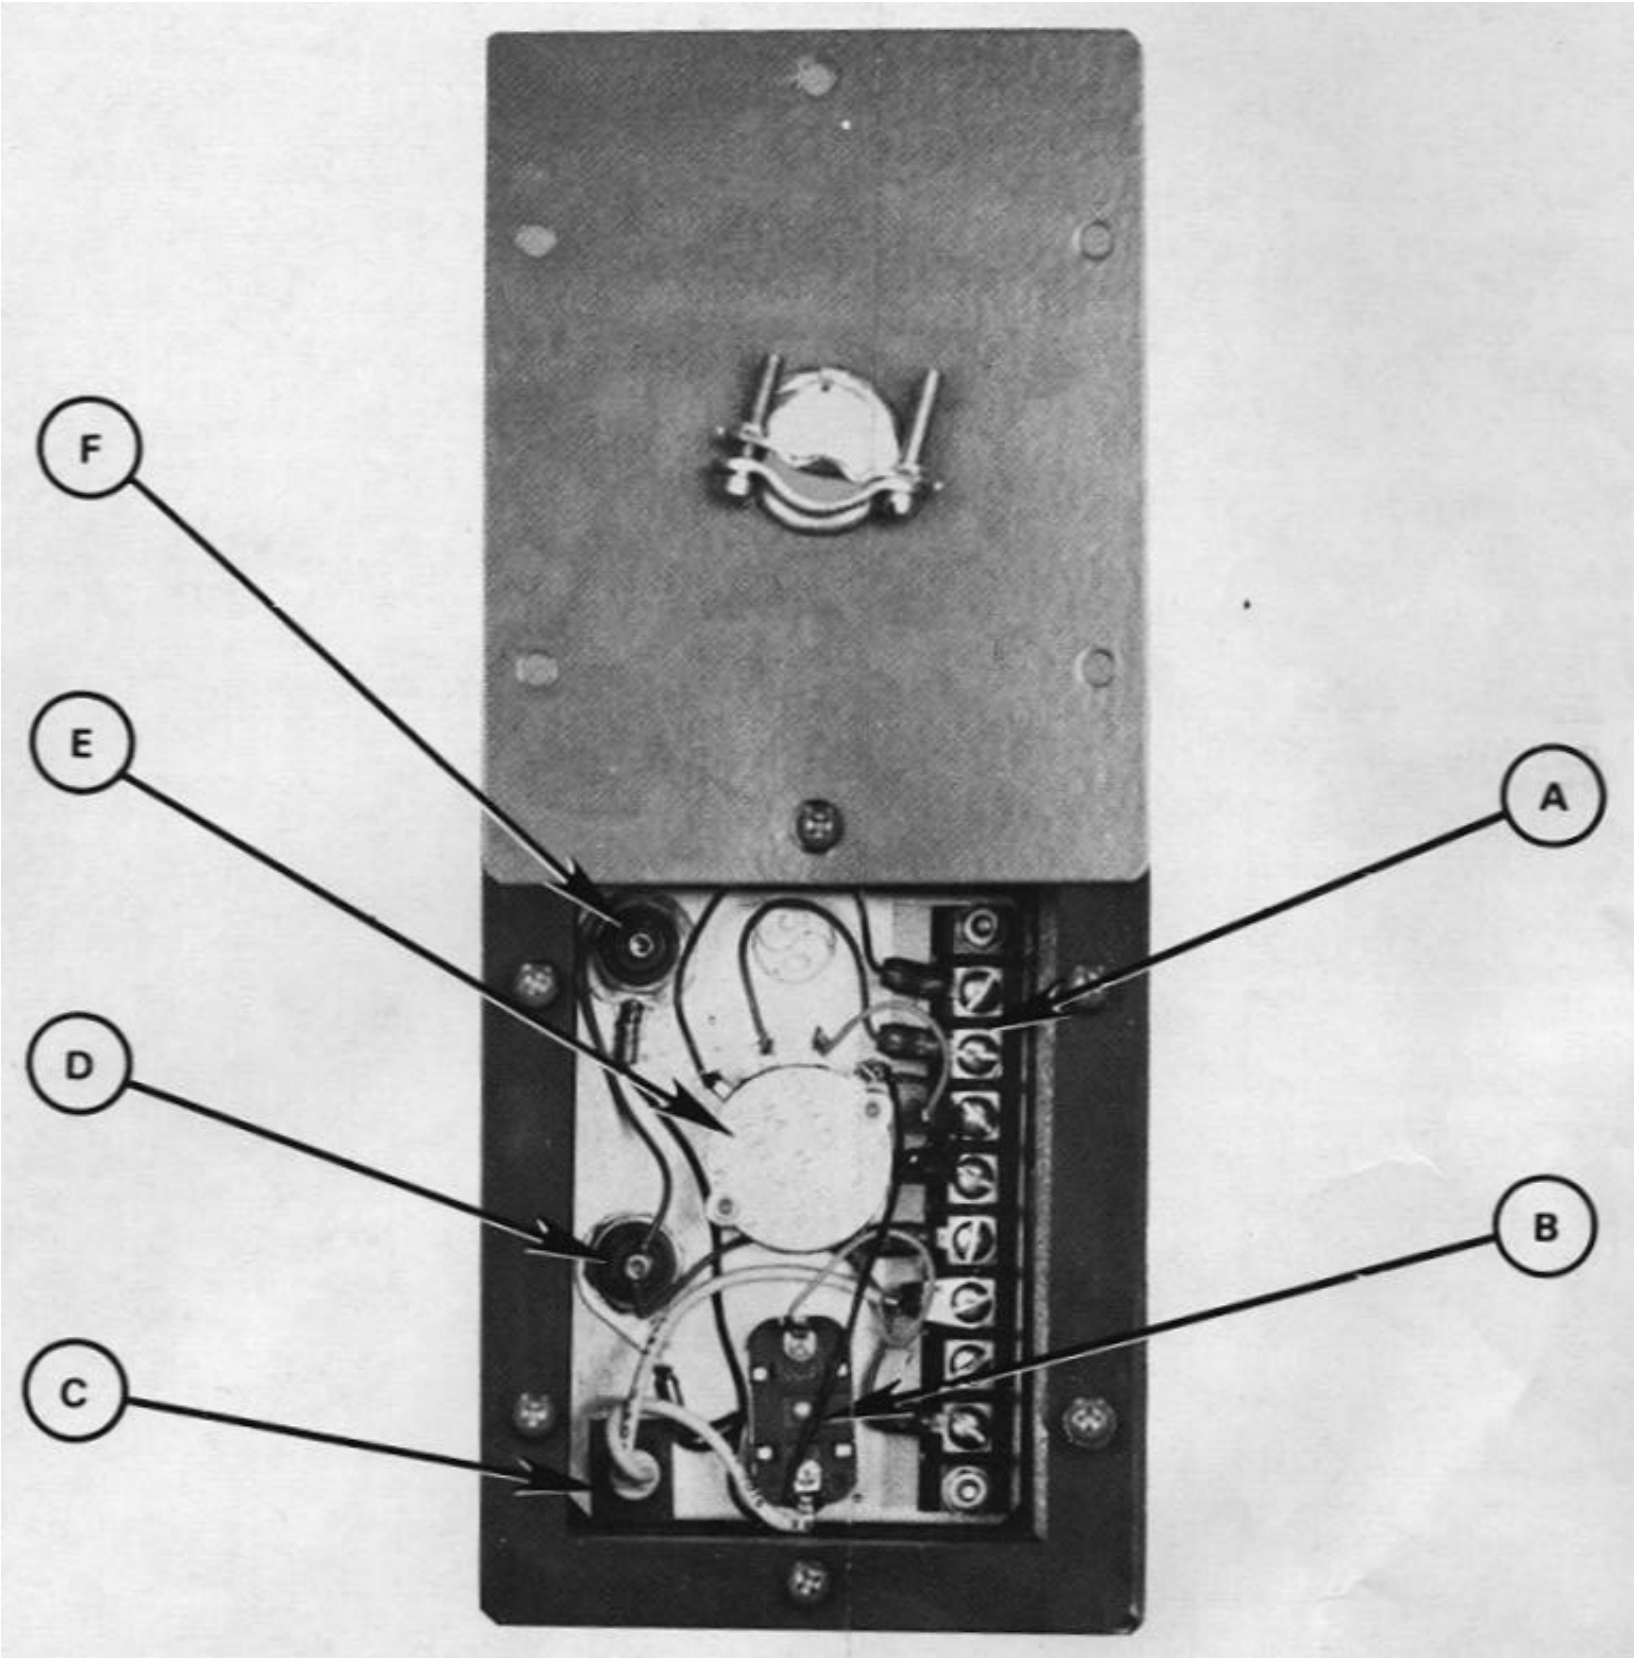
Control Indicator C-10260 Parts Location (V4)
